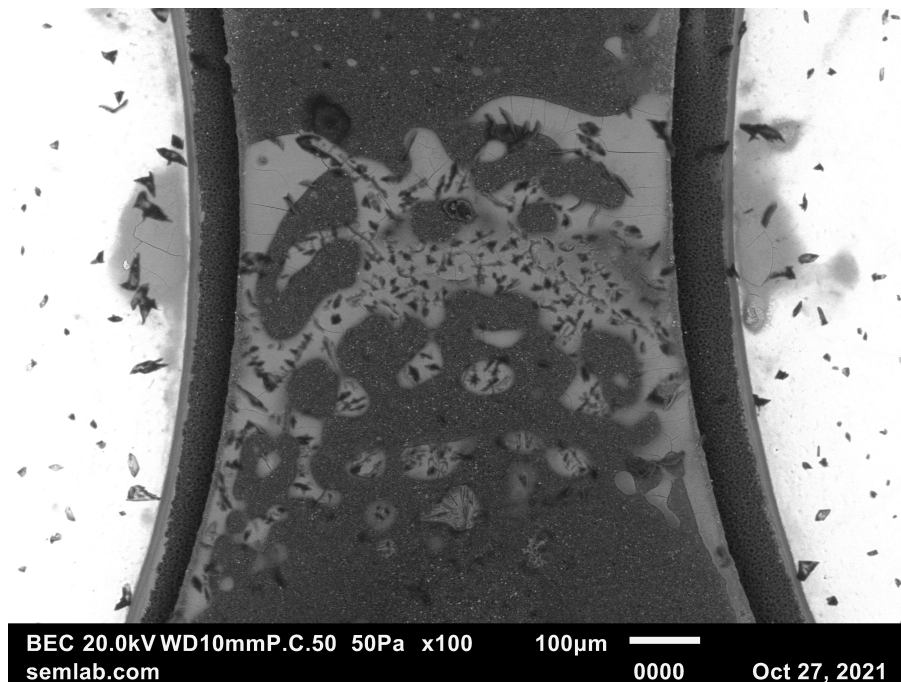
Fig. A - BSE SEM image of solder flux residue between two PTH solder joints.
